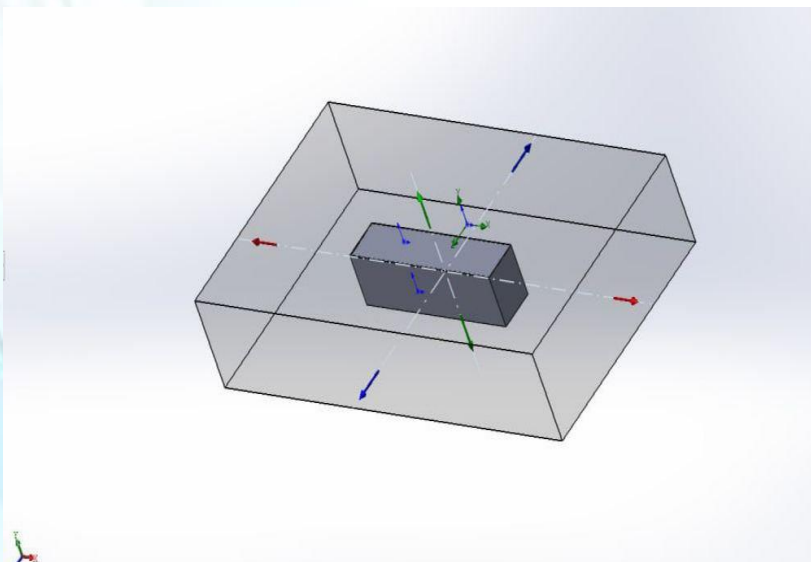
3D model of a 40-foot universal container obtained using Solidworks package software.
